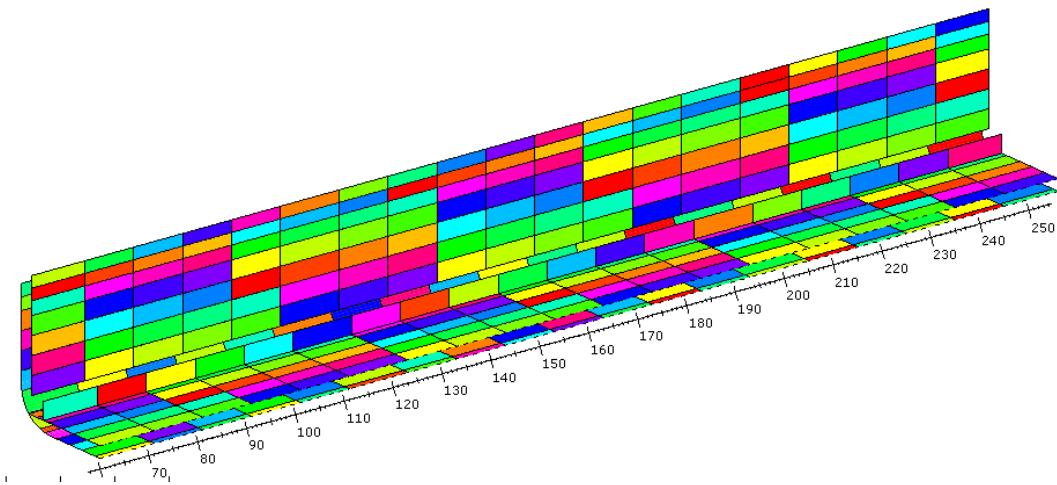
Extension of the longitudinal members (*Shell, longitudinal bulkheads, Inner bottom and top coaming*): Arrangement of the plates
